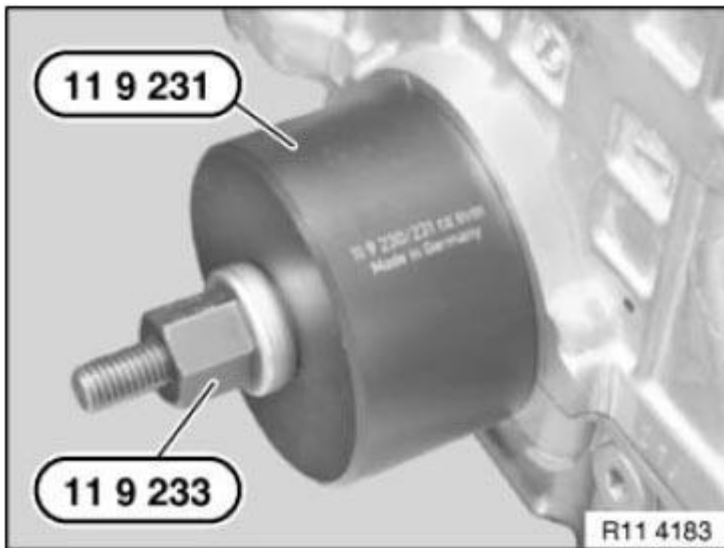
Inserting Radial Seal With Special Tool 11 9 231 And 11 9 233
